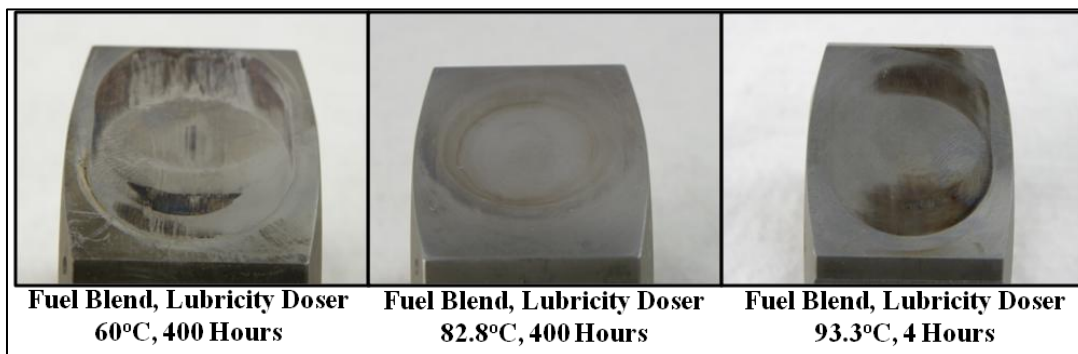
50/50 Jet A/SPK Blend Component Compatibility – Lower Ring Cam Face
